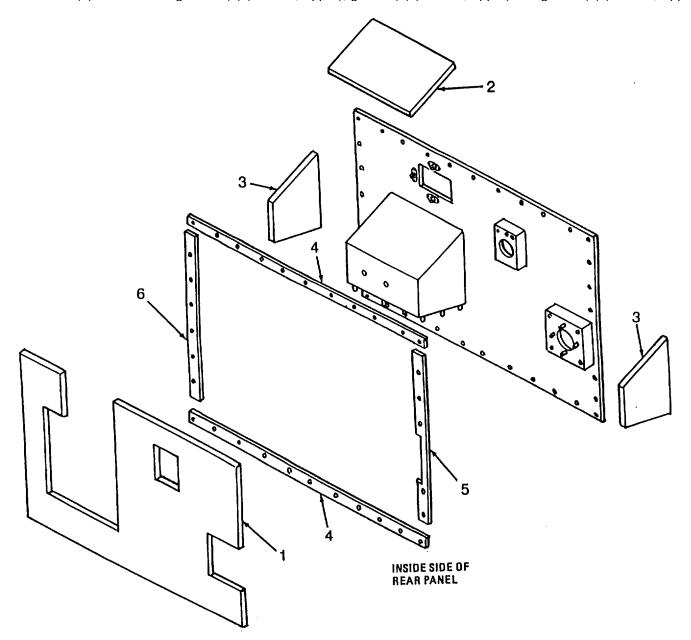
Rear Panel Assembly (Sheet 1 of 3)
